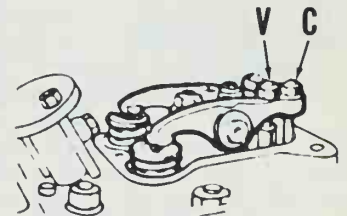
Drawing showing location of exhaust valve tappet adjusting screw (V) and compression release adjusting screw (C).
